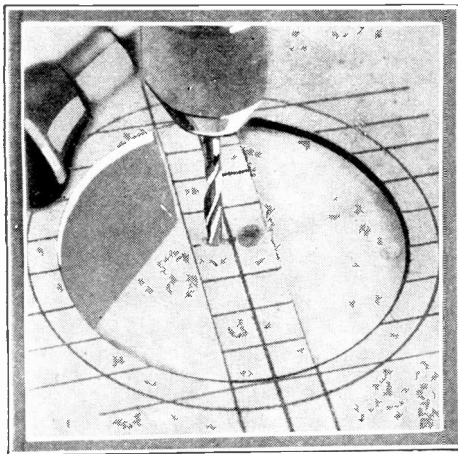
Drilling the center holes in the sections before cutting them apart. These holes are for the shaft. Work carefully to avoid breaking the cardboard.
